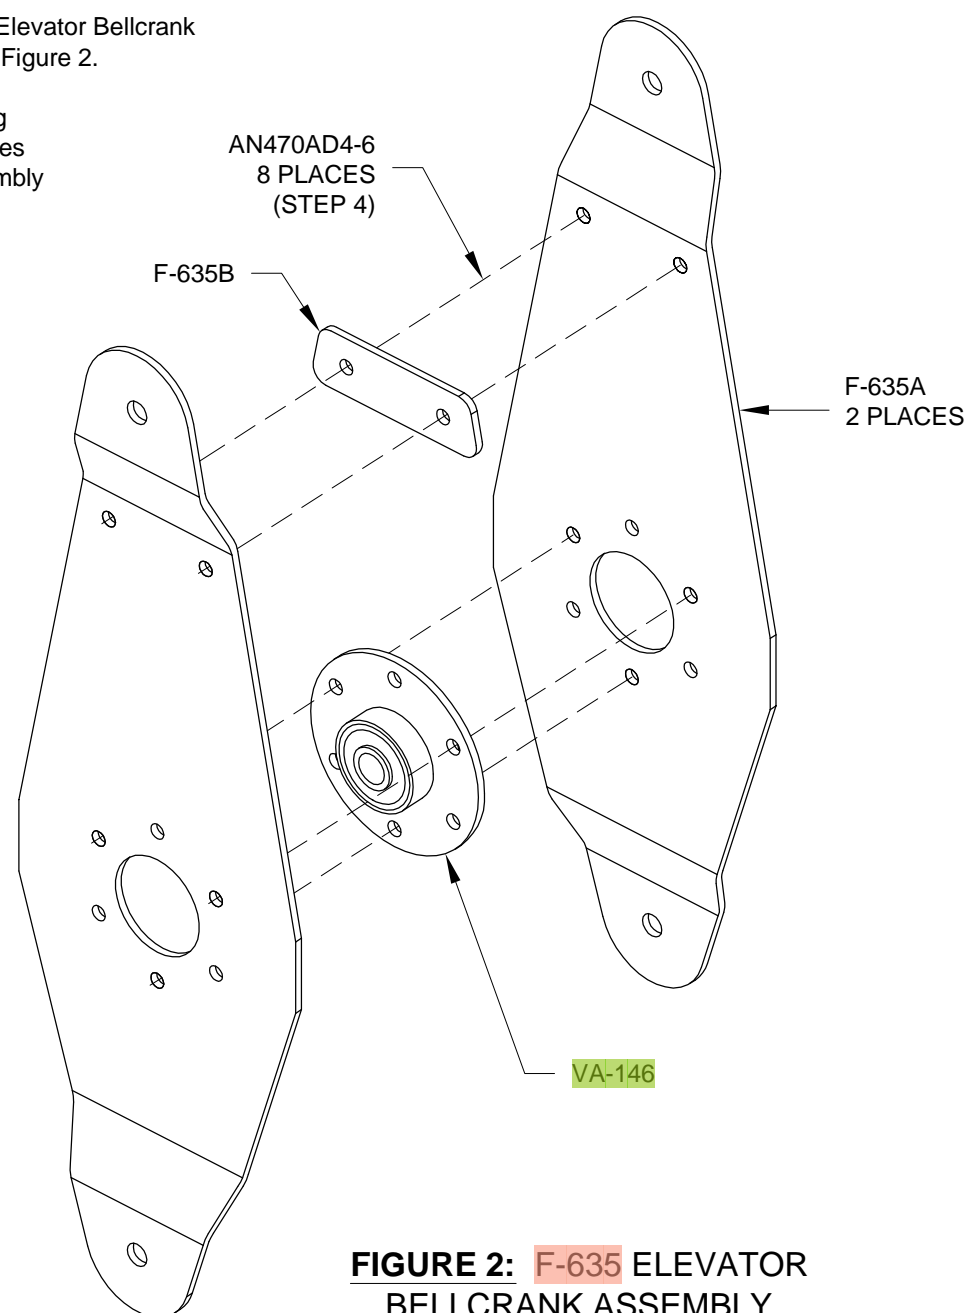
F-635 ELEVATOR BELLCRANK ASSEMBLY
